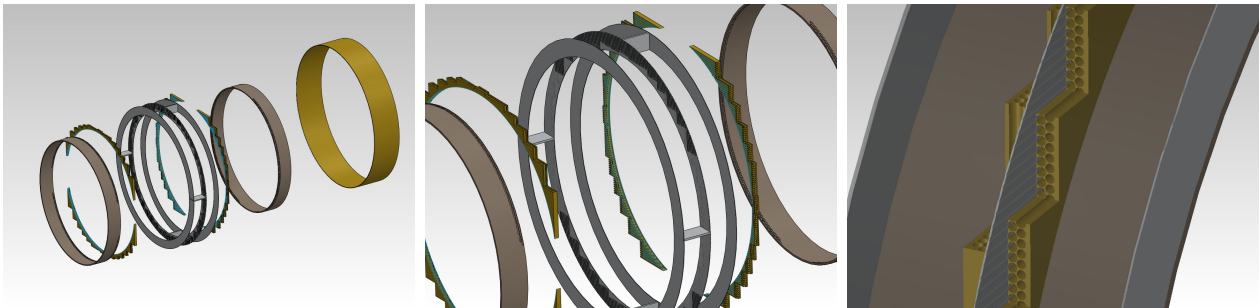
Detail of the support-structure design. (Left: Exploded elevation view. Centre: Close-up of exploded view. Right: Straw-spacing jig)
